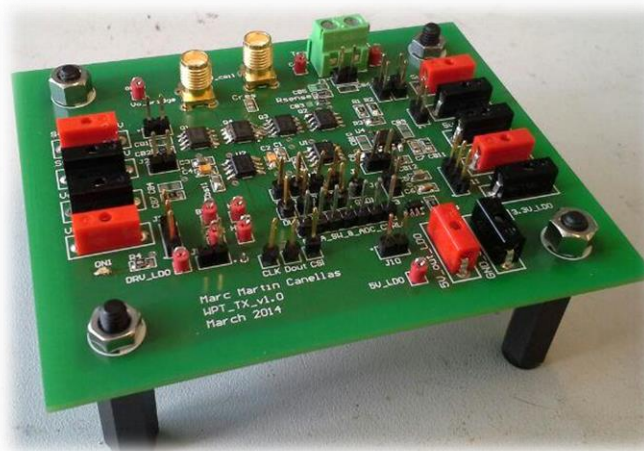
2 layer transmitter PCB (see appendix 9.2 for more info regarding PCB spec. and layout)
